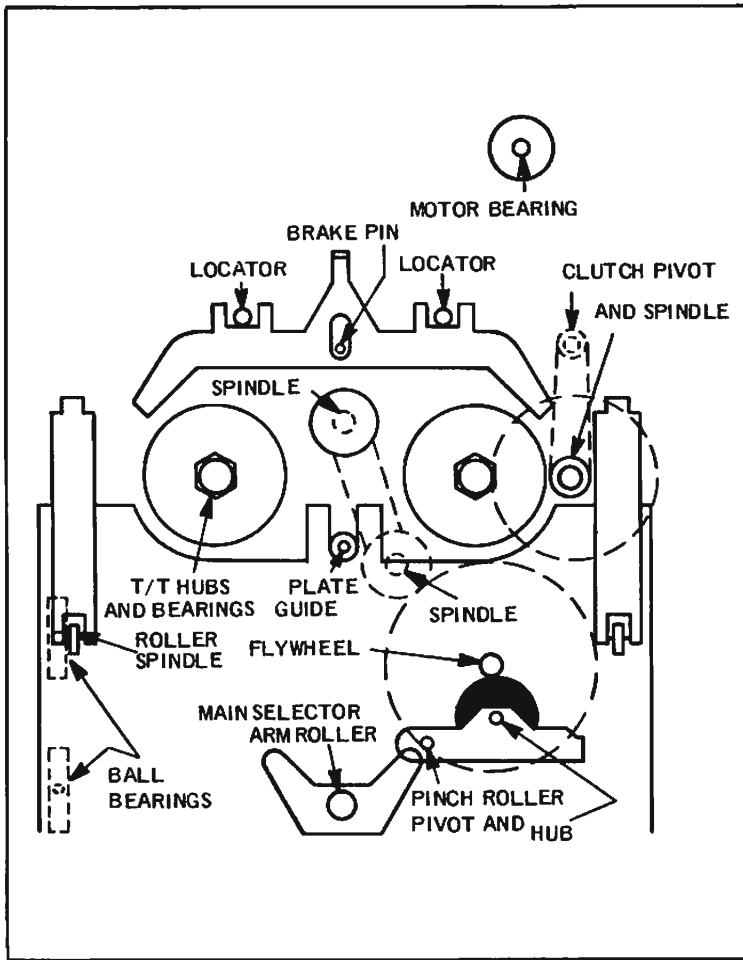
Showing lubrication chart. Apply light oil to rotating parts and medium grease to sliding parts.
